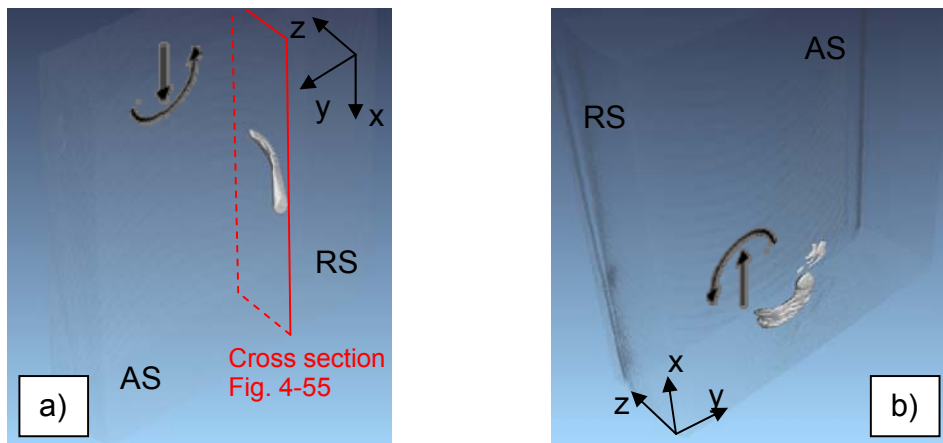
3D CT image of copper marker P001G a) and P001F after welding b)
